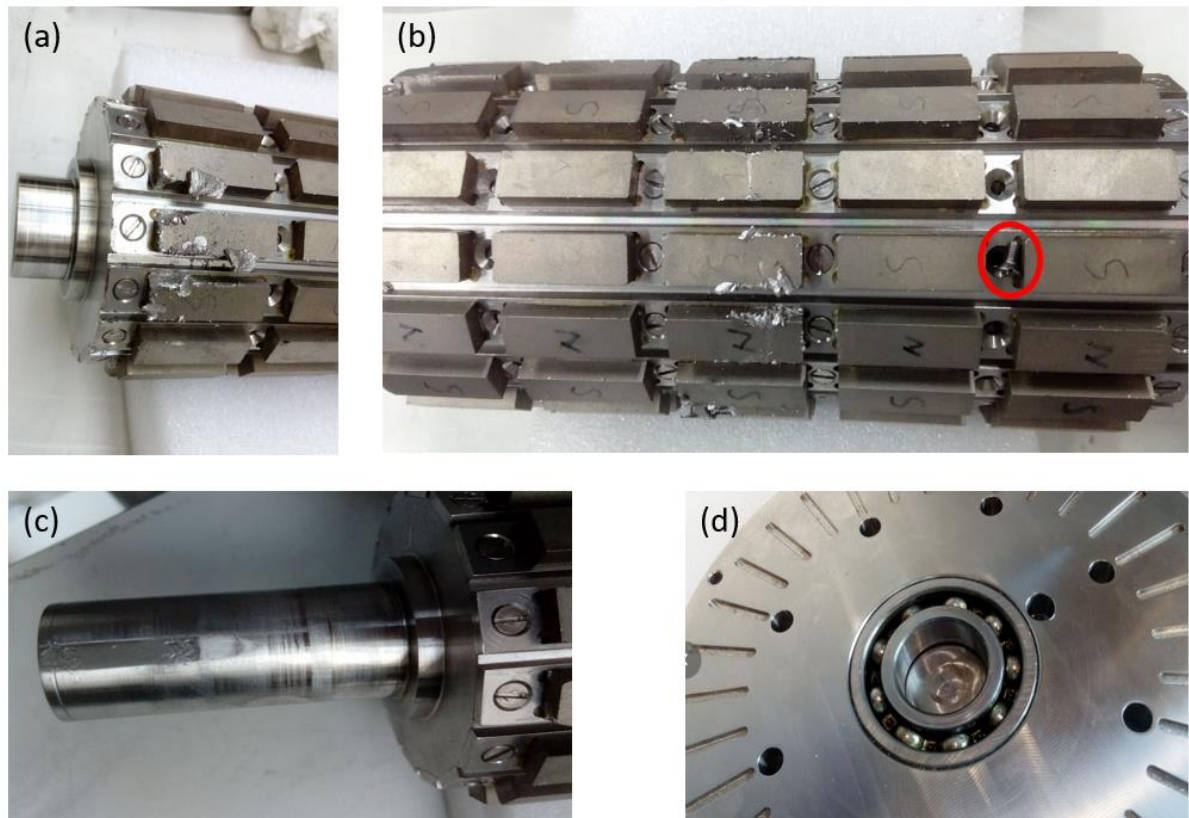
(a) chipped magnets, (b) a screw got loose on the core, (c) a damaged heater shaft and (d) failed rear bearing
